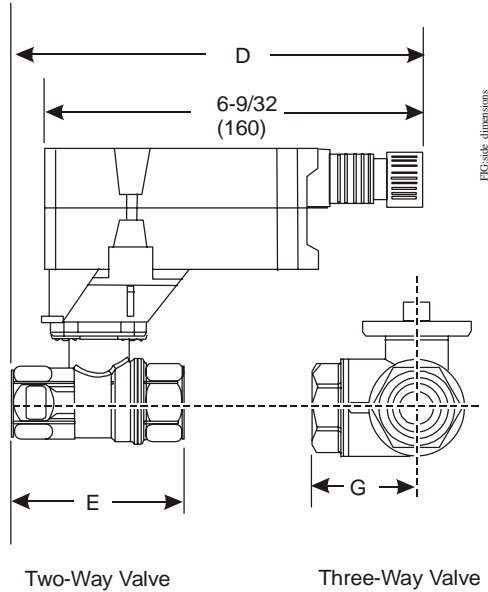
Dimensions of VG1241, VG1245, VG1841, and VG1845 Series Ball Valves with VA2202 actuators, in. (mm), Side View
